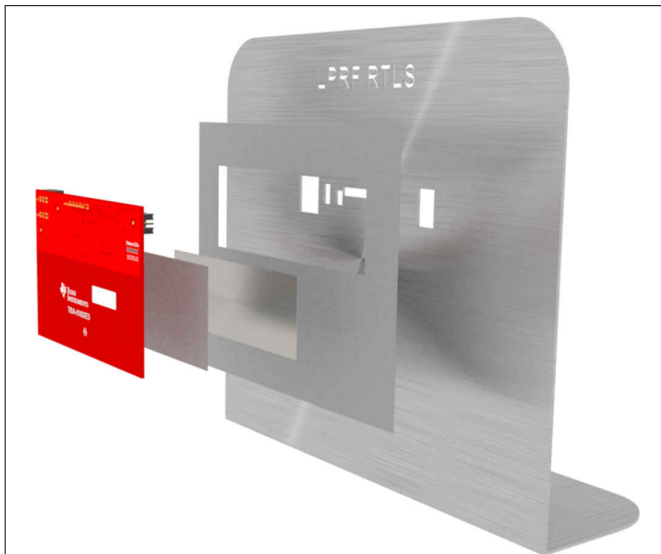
PCB + RF Absorbing Material + Tin-Plated Copper Foil + Metal Individual Pieces
